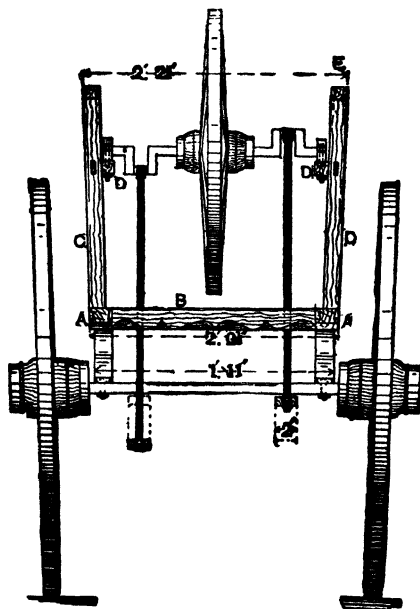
Rear Elevation of Outler's Pony Barrow.
